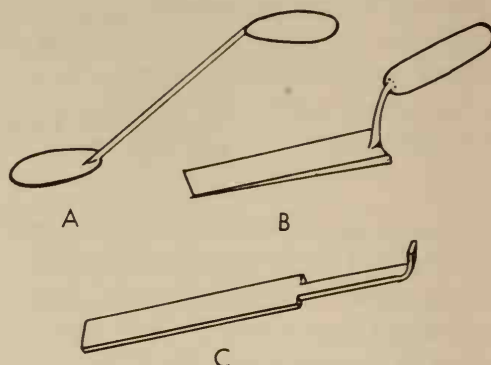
Molder tools. (A) Slick and spoon; (B) Trowel; (C) Lifter.
